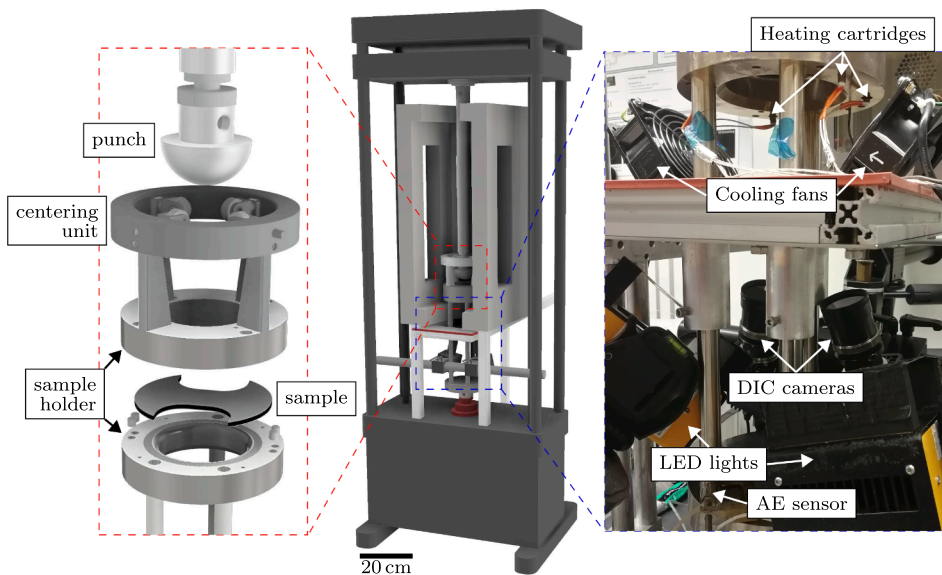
Front view of the CAD model of the developed Nakajima setup in a universal testing machine with detailed views of the sample holder (left) and an image of the setup with sensors, as well as heating and cooling equipment (right).
